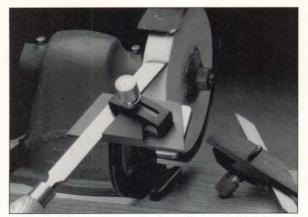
Skew grinding jig from Veritas holds skew at correct angle so cutting edge is flush to the grinding wheel across its width. A pivoting feature enables you to sharpen radiused skews, also. About \$22.
